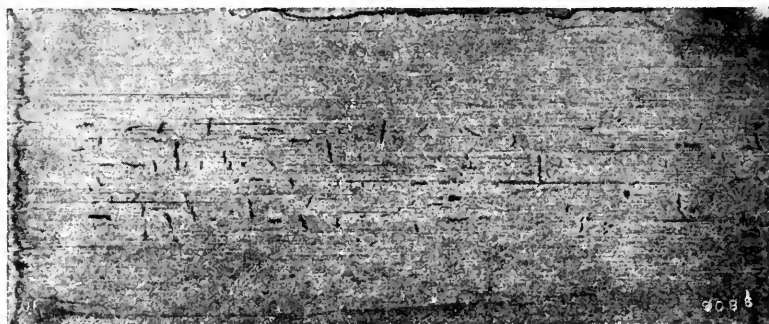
ETCHED HORIZONTAL SECTION AT END OF RAIL 9086.
